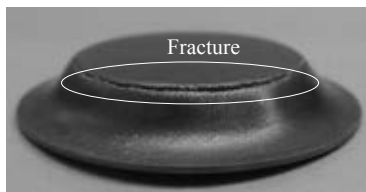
Fracture in drawn cup with punch having corner radius of 1mm
